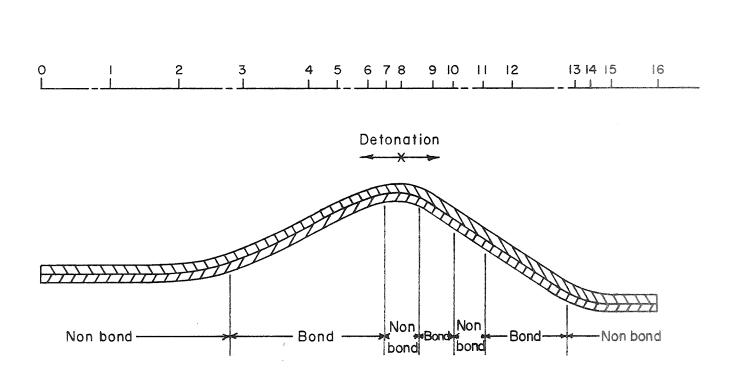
SCHEMATIC SHOWING BONDED AND NONBOND AREAS IN SECOND STAINLESS STEEL MOCK-UP-TO-SHELL WELDING EXPERIMENT
